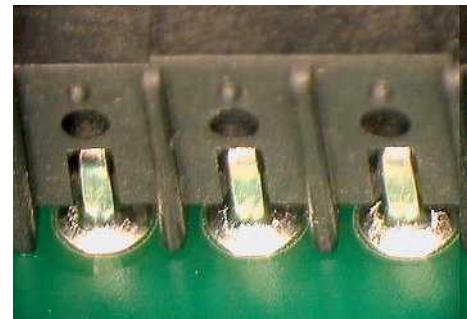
Typical lean THR soldering spot on the secondary side of the PCB with more than 75% soldering pad wetting and 100% perimeter wetting
